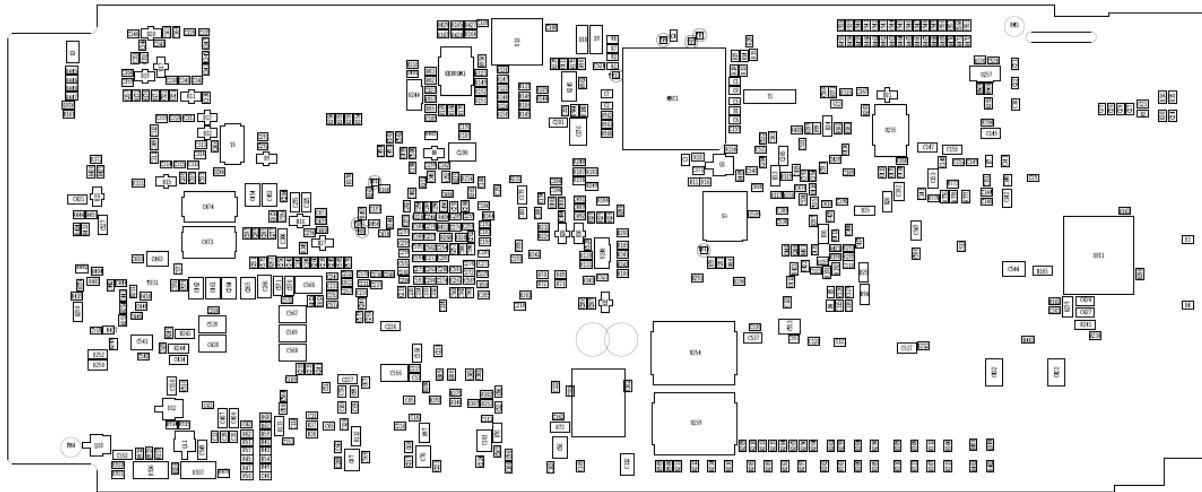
TMDXEVM6678L EVM Board layout – Bottom view
